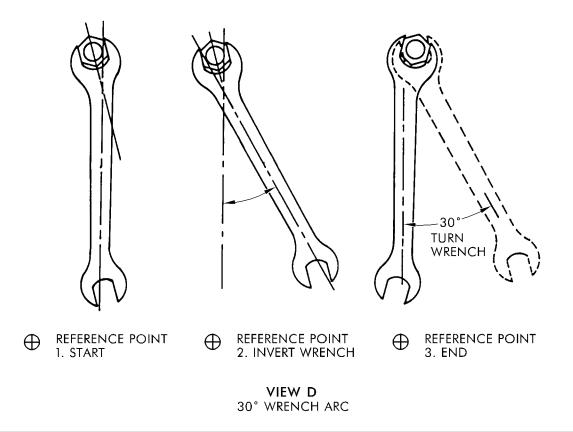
Wrench-Arc Tightening Techniques (Sheet 1 of 3)
